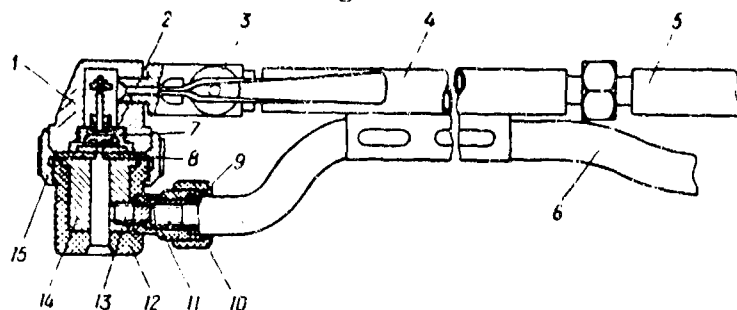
EKD-4 Electrode Holder: 1 - frame; 2 - nonreturn valve; 3 - oxygen valve with lever; 4 - handle with fitting; 5 - oxygen hose; 6 - current conducting (welding) cable; 7 - safety valve; 8 - paronitic lining; 9 - rubber lining; 10 - coupling nut; 11 - textolite bushing; 12 - textolite cup; 13 - threaded connection with textolite bushing; 14 - head; and 15 - coupling nut.
